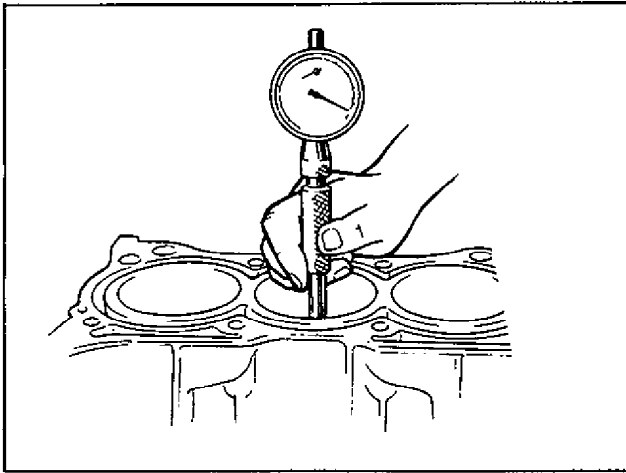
A-110 Measuring Cylinder Bore with Cylinder Gauge
